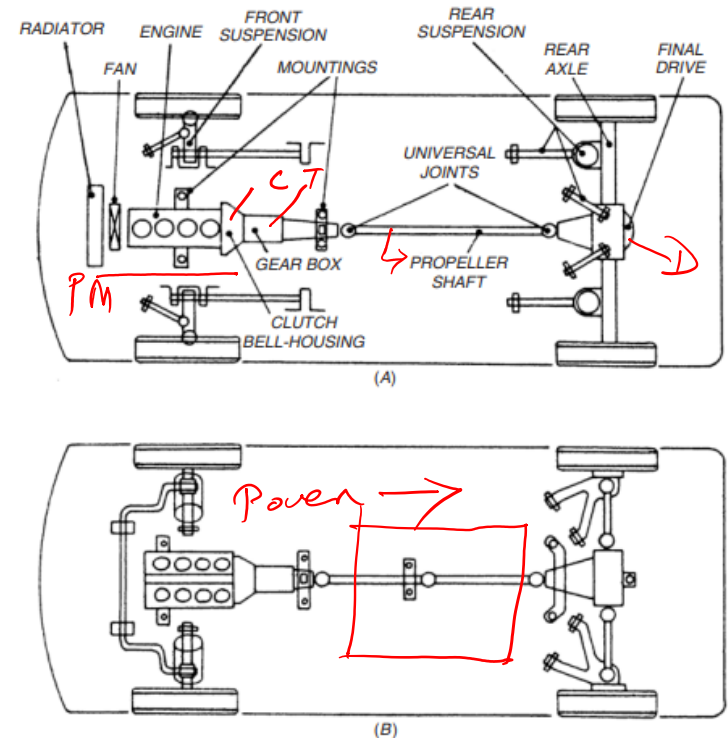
Front-mounted engine and rear-wheel drive.
